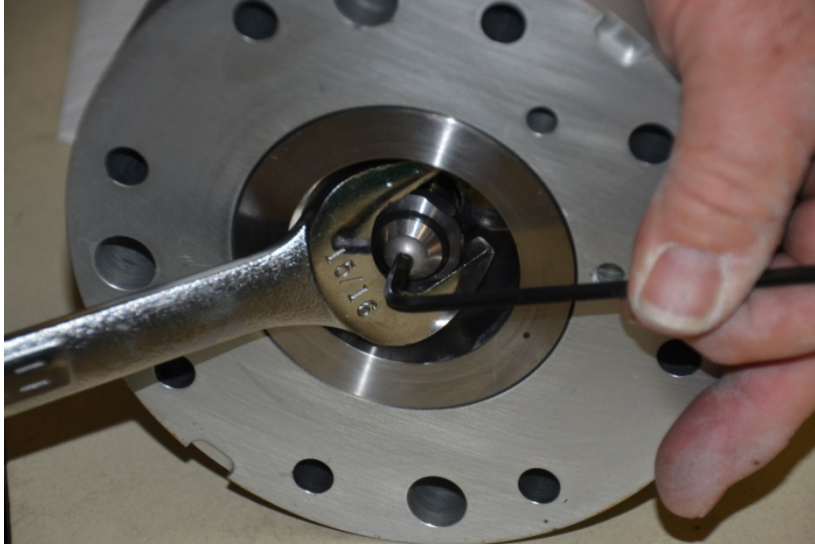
Hold Actuator Shaft with Wrench when Tightening or Loosening the Retaining Screw
